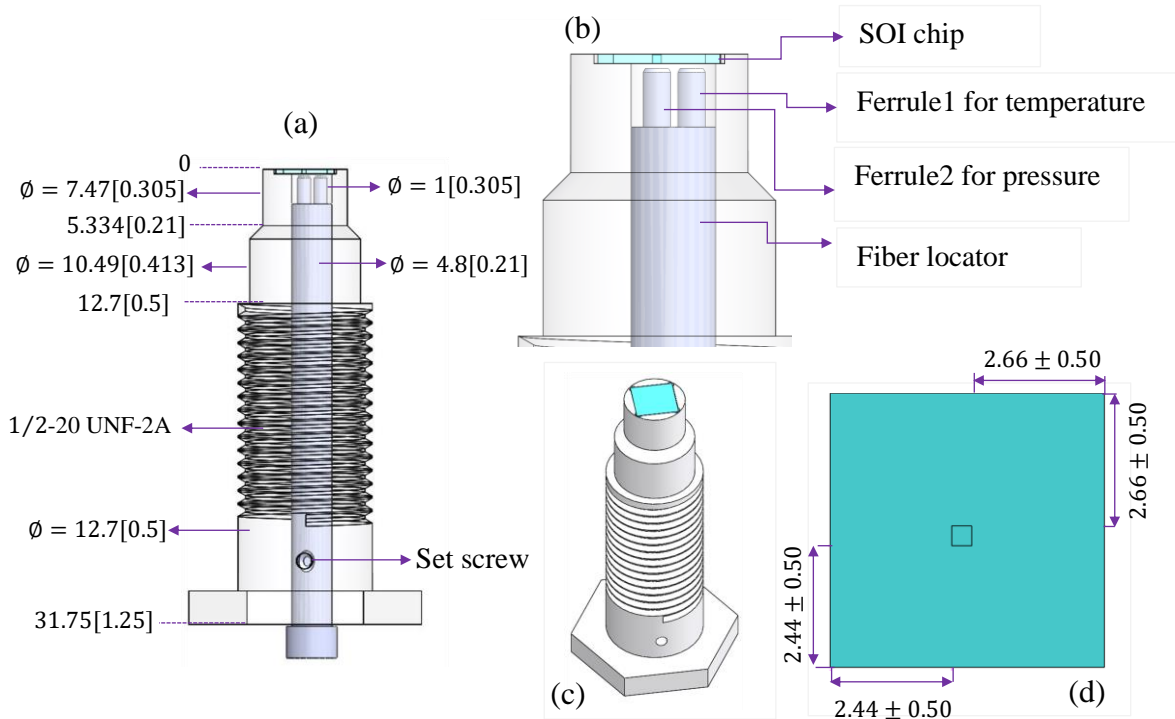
The packaging assembly: (a) a transparent view with dimensions in mm [inches], (b) a detailed view of the parts, (c) a full isometric view of the packaging and (d) a detailed two-dimensional plot of the model geometry of the SOI chip.
